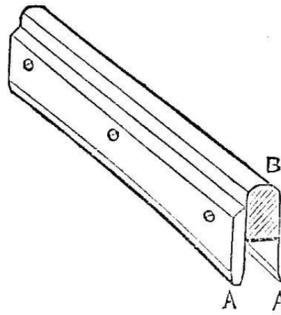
Wooden Tool with Brass Screws—A, A, Blades; B, Centre-Piece.
